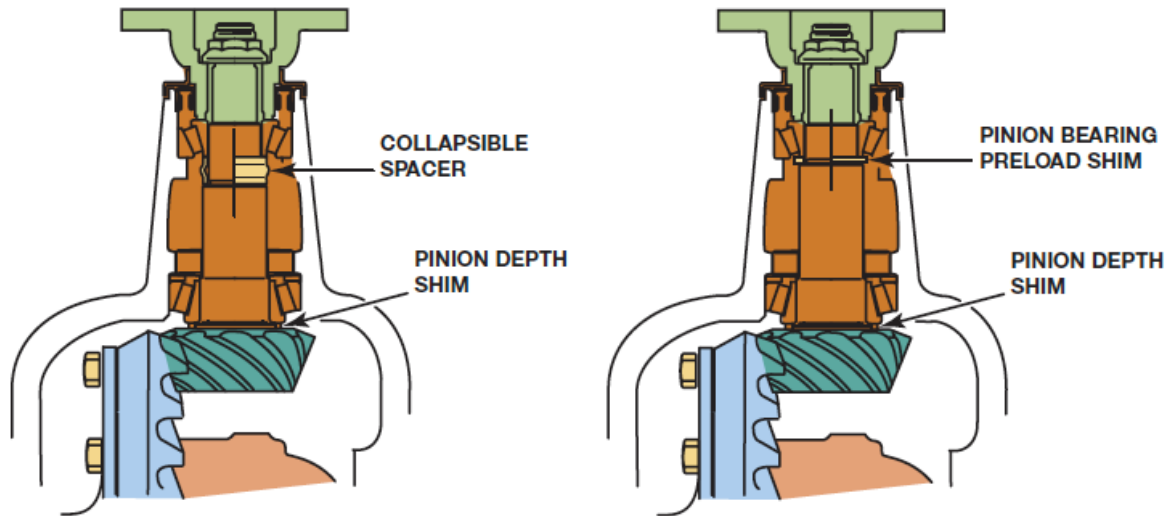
Two types of bearing spacer. The crush-type is the most common.
